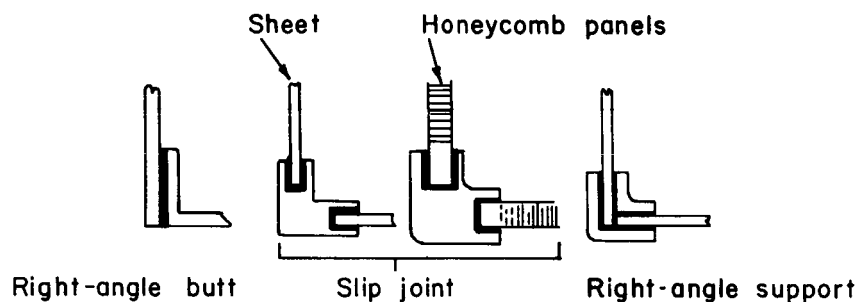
SHEET-METAL AND PANEL-EDGE-JOINT DESIGNS
